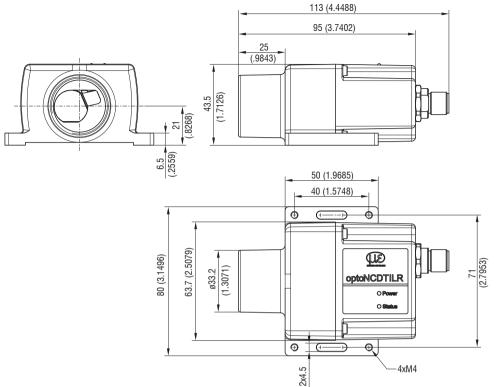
Dimensional drawing optoNCDT ILR3800-100, dimensions in mm (inches, rounded off)
